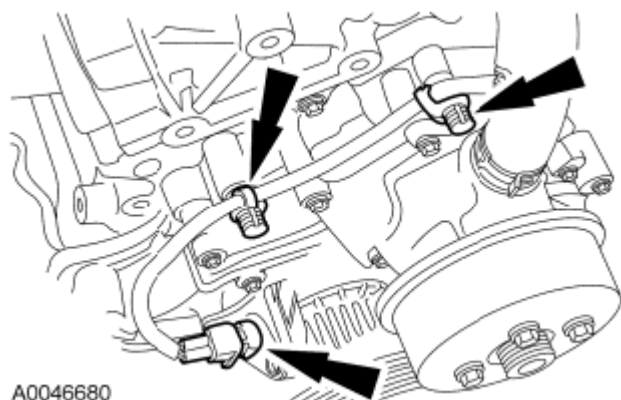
Locating Crankshaft Position Sensor Electrical Connectors And Wiring Anchors
